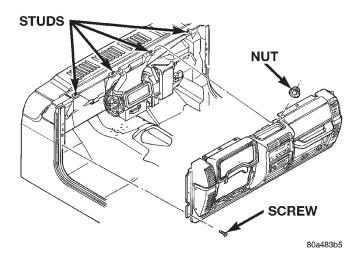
Instrument Panel Assembly Remove/Install INSTALLATION
